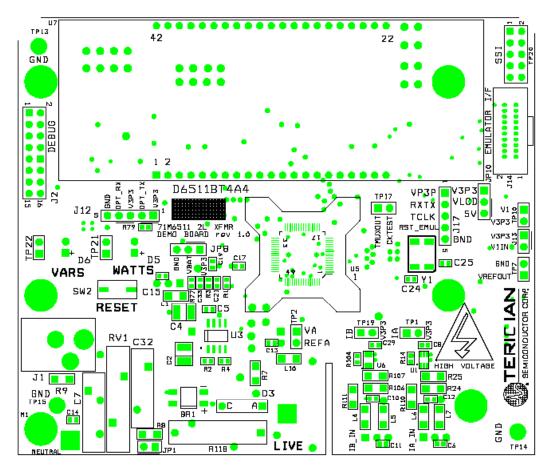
71M6511 2-Layer Demo Board (Xformer Power Supply): Top View
